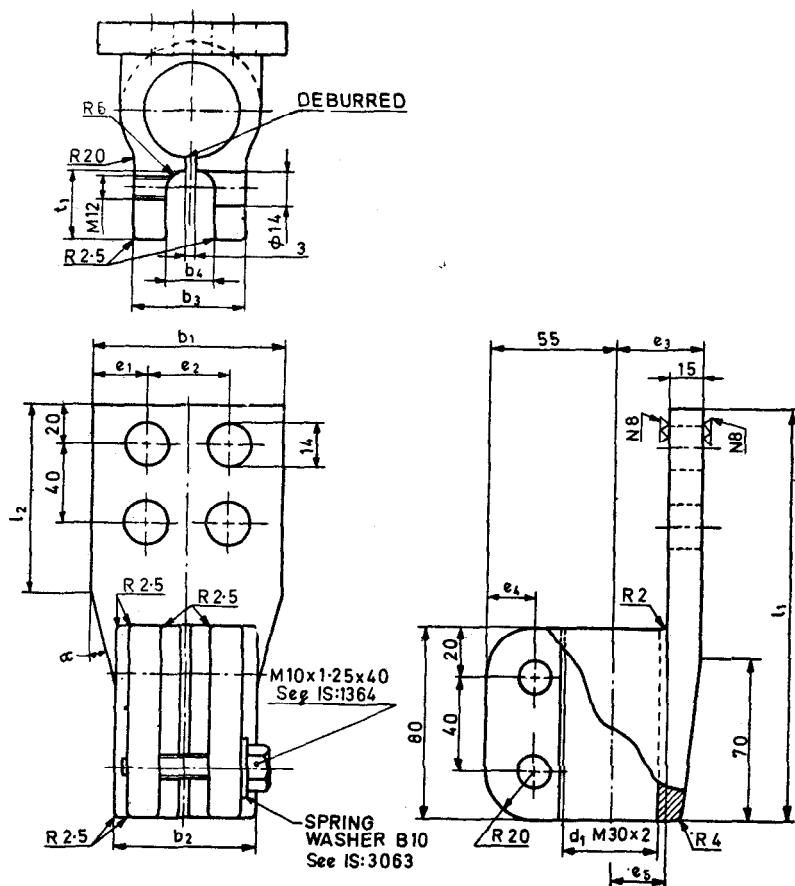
(A) CONNECTING LUG (FOR 36 kV/1 000 A RATING) — Contd
